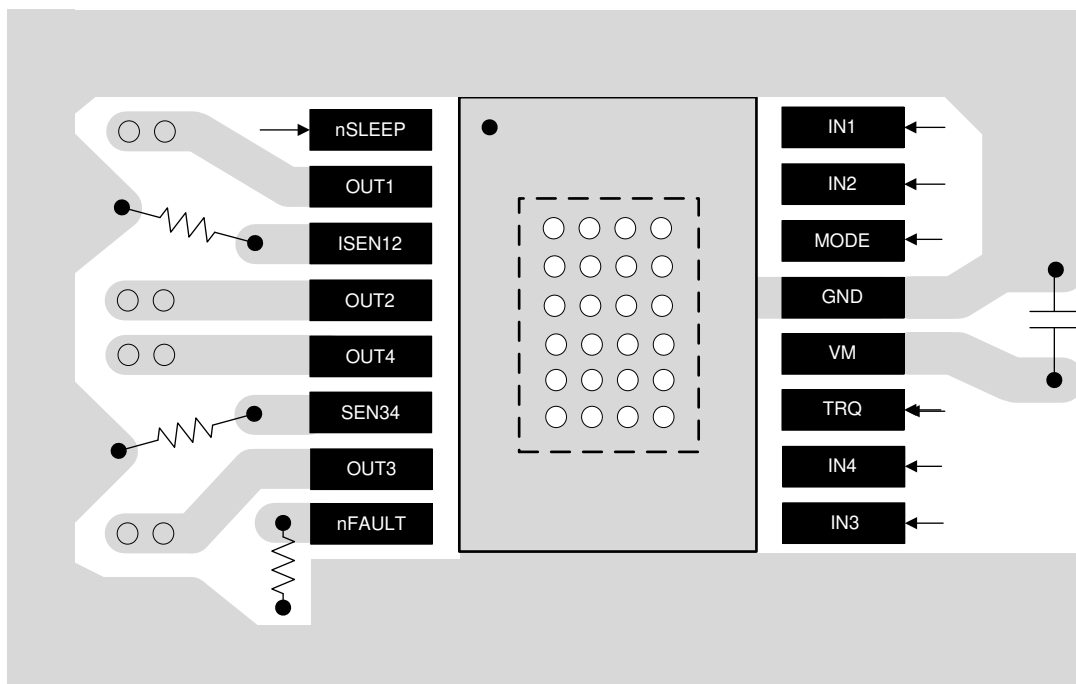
Layout Recommendation of 16-Pin HTSSOP Package for Double-Layer Board
